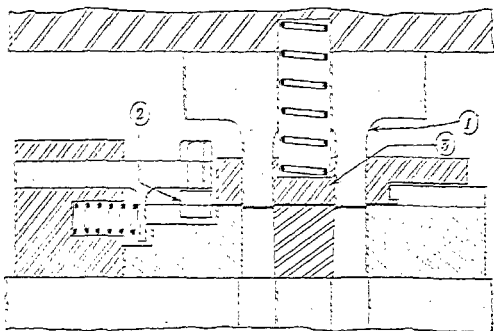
Progressive die incorporating a rotating punch for forming wire spring rings.¹
